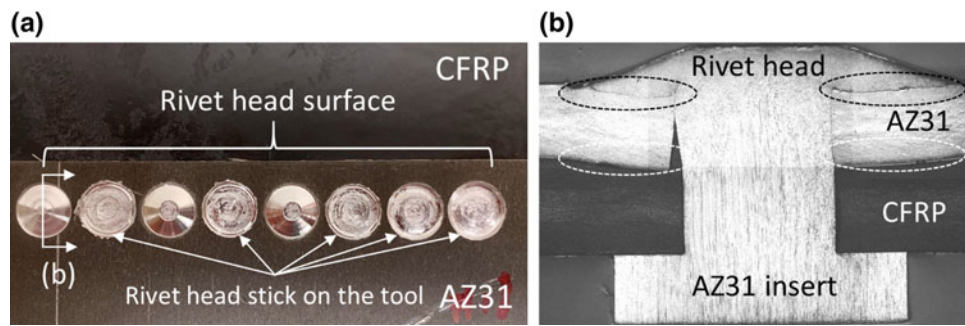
a Rivet head appearance and b cross-section of riveted AZ31/CFRP sheets with AZ31 insert via tool #2. Note that the unmixed region between rivet head and top AZ31 sheet is labelled with
